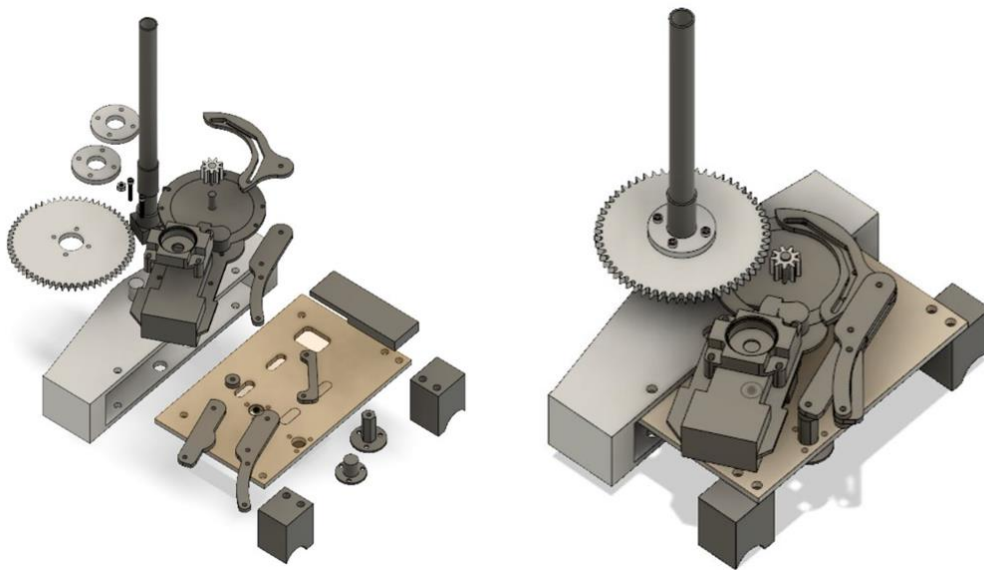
Exploded Steering System (Left) and Completed Steering System (Right)
